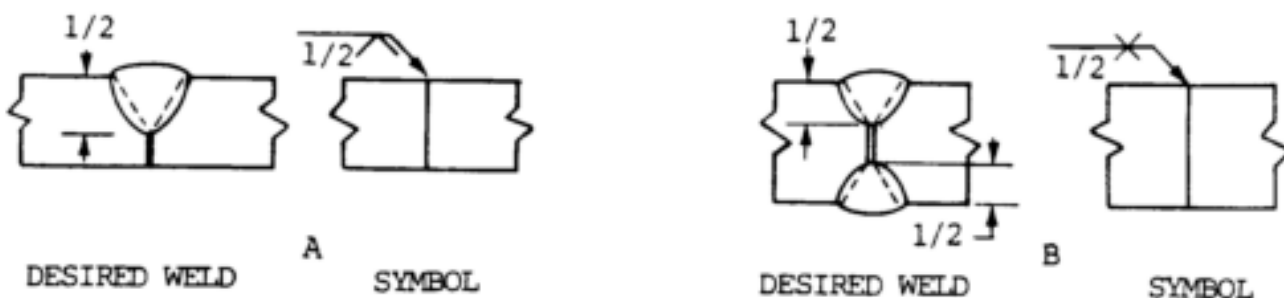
Groove weld dimensions for welds extending partly through the members joined.
